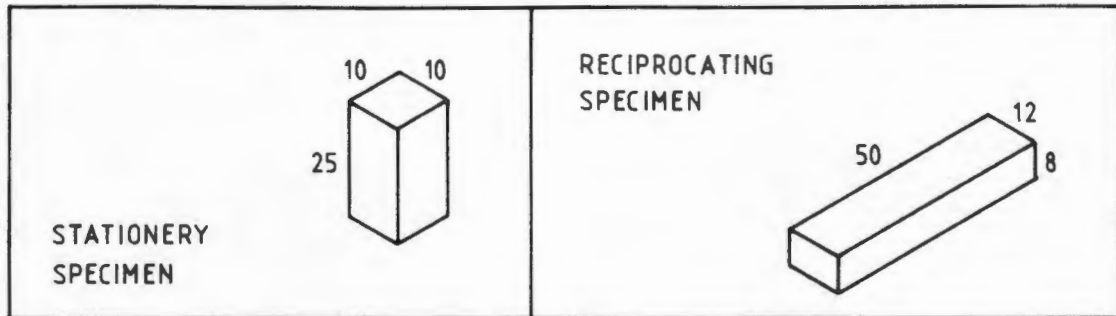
TEST SPECIMENS RECOMMENDED
